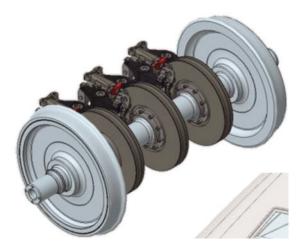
Elements of the braking system on the axle of the carrier bogie: brake discs and calliper brake assemblies
